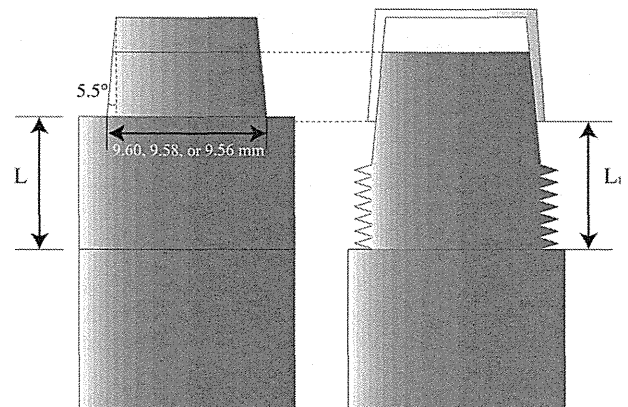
Schematic diagrams of a metal die having a taper of 11° used to evaluate machining accuracy.
